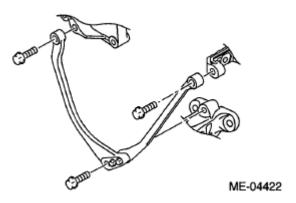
Identifying Stopper Rod Courtesy of SUBARU OF AMERICA, INC.
